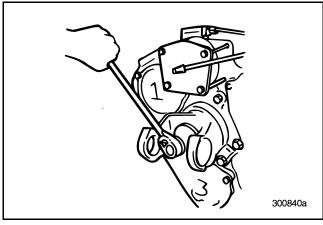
Removing Clamp Plate and Capscrew (T313L/T318L Shown)
